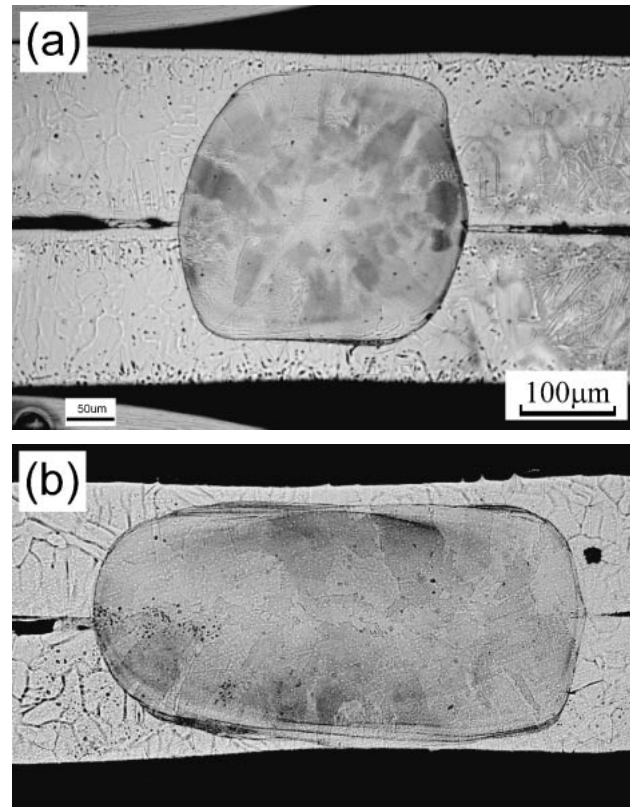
Cross sections of weld nuggets, (a) 1000 A and (b) 1400 A.
